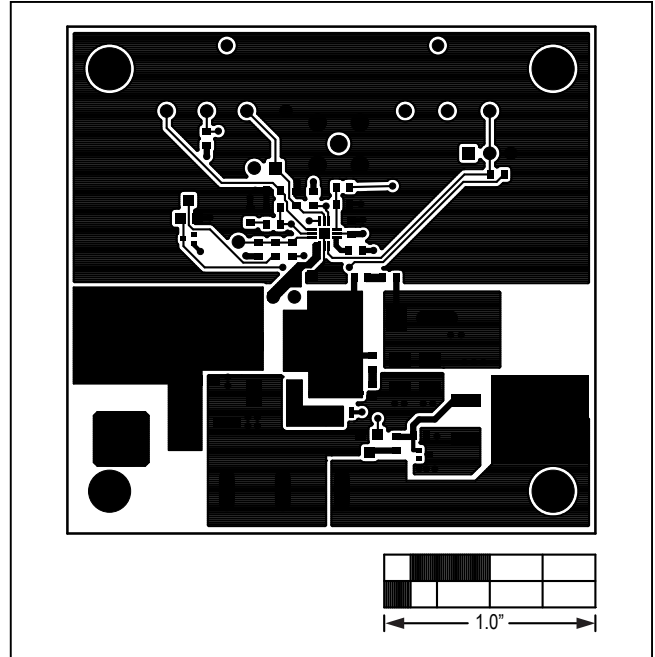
MAX16990 EV Kit PCB Layout—Component Side
